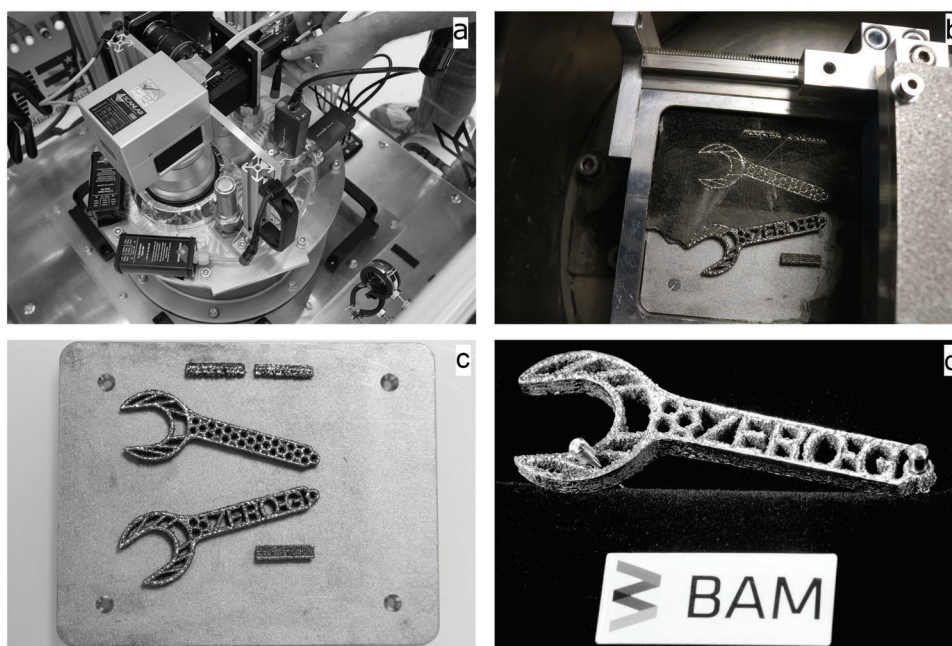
a) Top view of the deposition chamber, showing the laser scanner and optics, two oxygen sensors, two pressure gauges, and two overpressure safety valves b) view of the deposition unit during cleaning after a parabolic flight, showing the wrenches produced by LBM still partially embedded in the powder bed c) top view of the porous metal base plate and of the wrenches manufactured in μ -gravity d) 12 mm wrench manufactured in μ -gravity, after separation from the base plate. The base plate has a size of $106.5 \times 85.5 \text{ mm}^2$.
